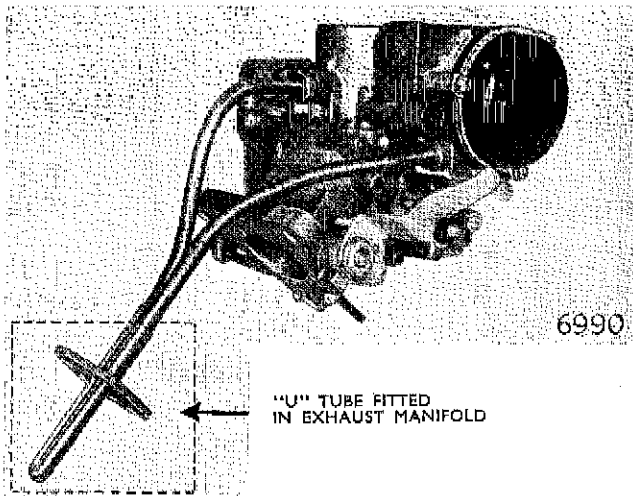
"U" tube used in exhaust manifold and connections to carburettor
